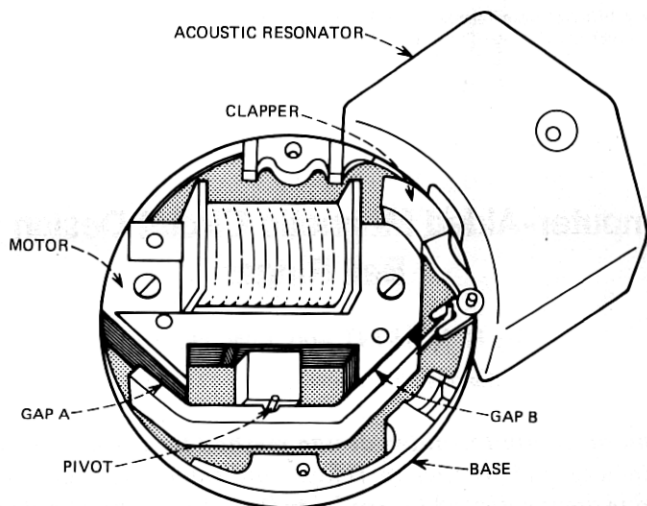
Ringer with rocking-armature motor (gong and clamp plate removed).
